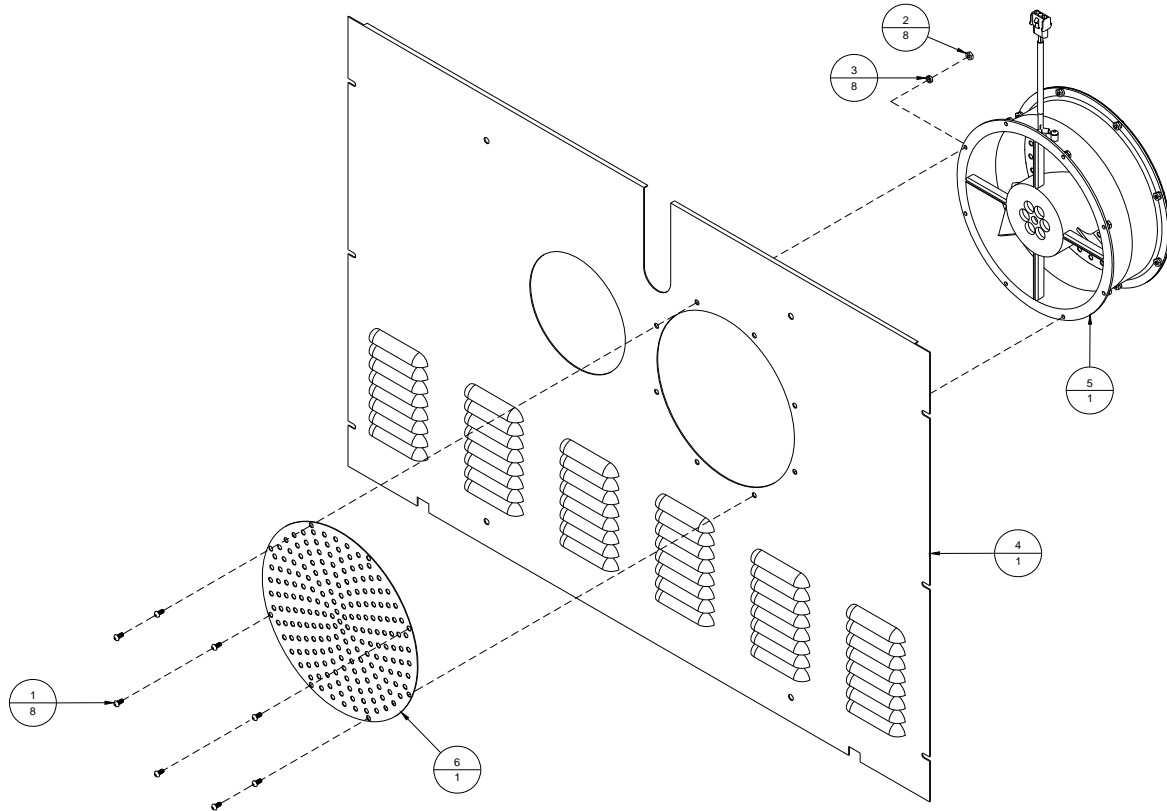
(9101807A), Rear Cover Assembly, BK750
